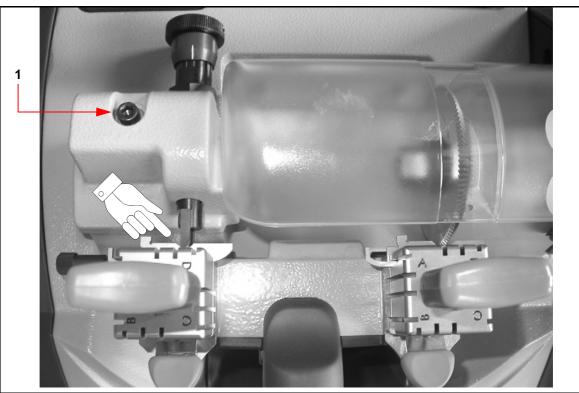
Checking and adjusting the milling cutter - tracer point gap
